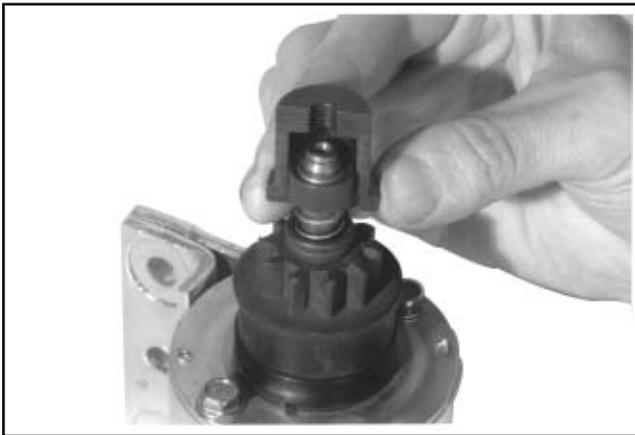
Assembling Larger Inner Half Around Spring Retainer.
